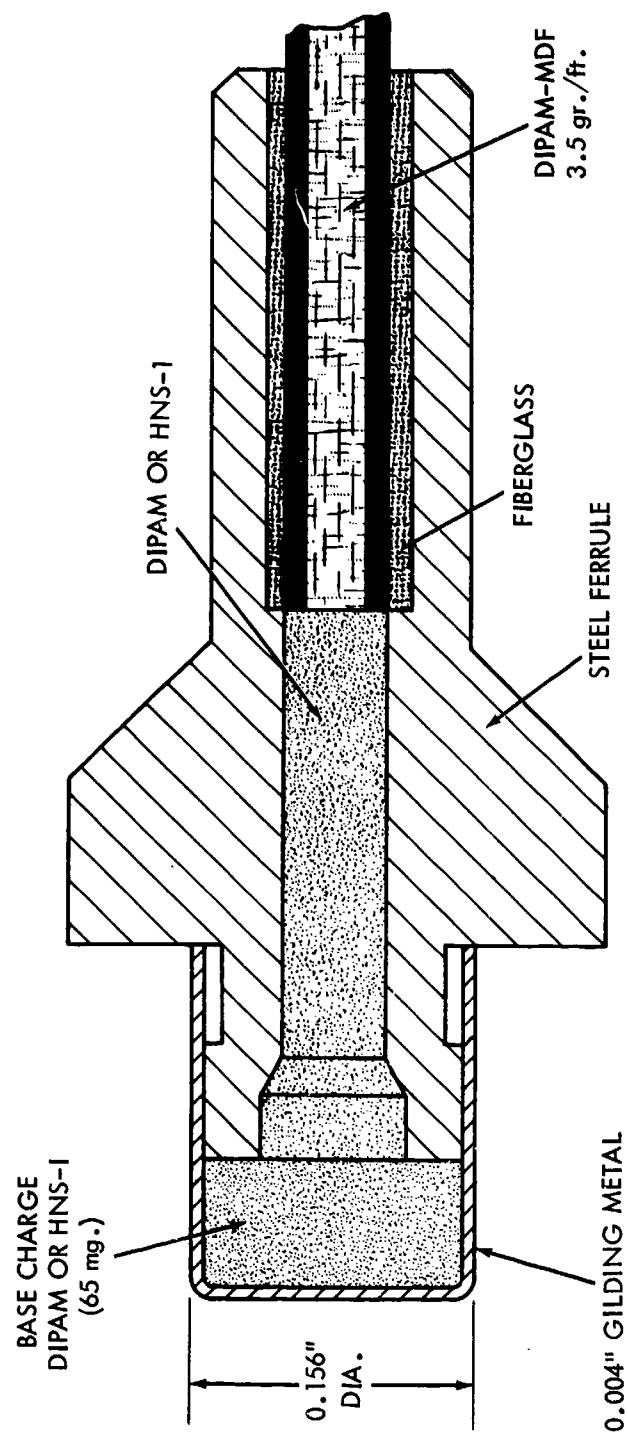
END BOOSTER DESIGN CONFIGURATION #8 (EXPLOSIVE TECHNOLOGY, INC.)
